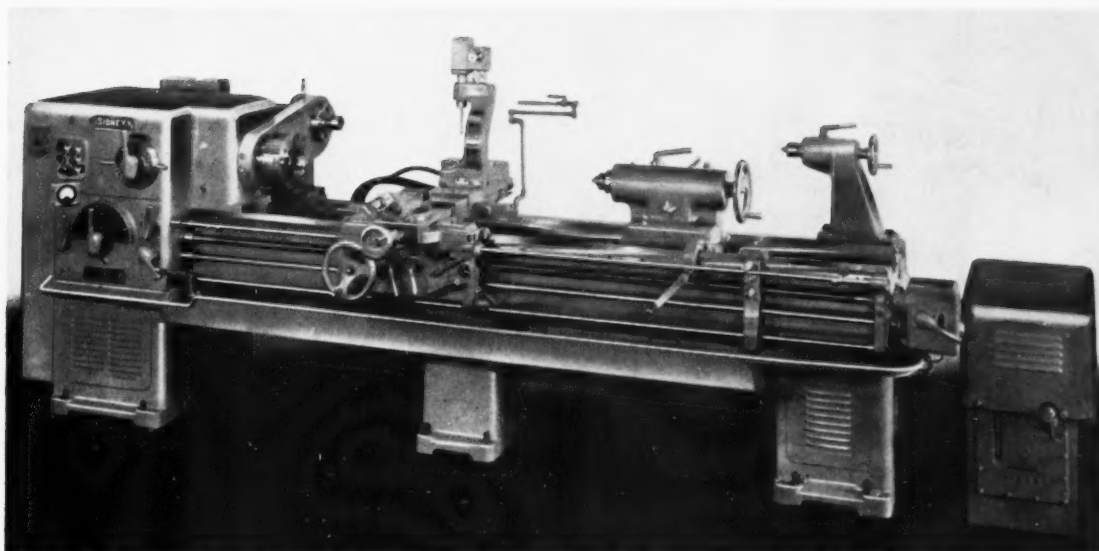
Sidney fluid tracer lathe equipped with rotating drive for template or master part used in the production of duplicate pieces
